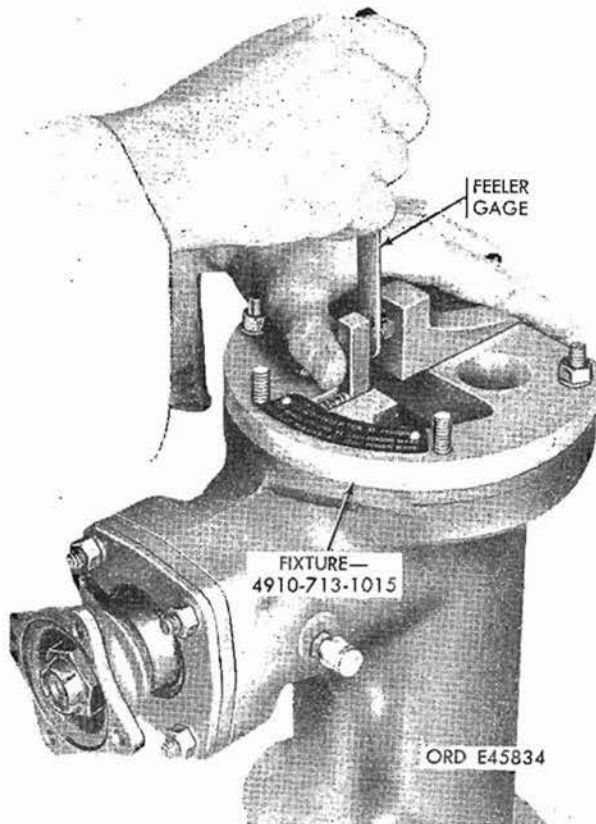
Checking depth of drive pinion using fixture - 4910-713-1015.
